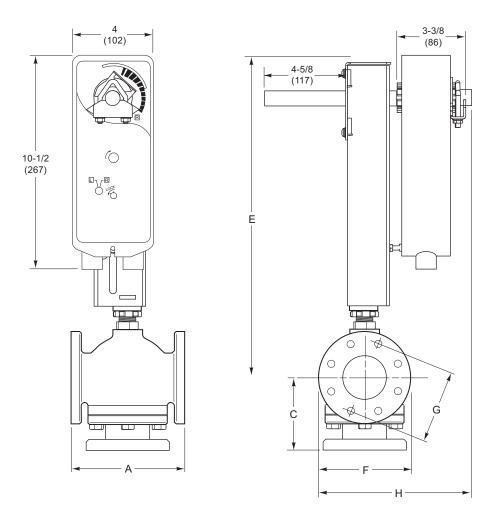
Mx41-715x-2xx or Mx41-707x-2xx with 2-1/2" to 4" 3-Way Flanged Globe Valve With AV-607-1 Linkage.
